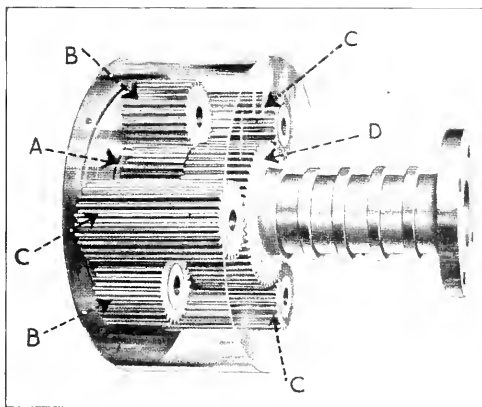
REVERSING GEAR FOR THE ATLAS IMPERIAL ENGINE COMPANY MARINE ENGINE
